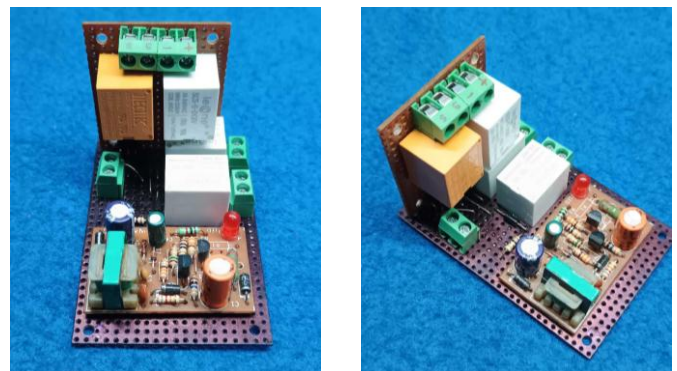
, Fig -5: Custom Changeover Relay PCB (Zero PCB Build)
